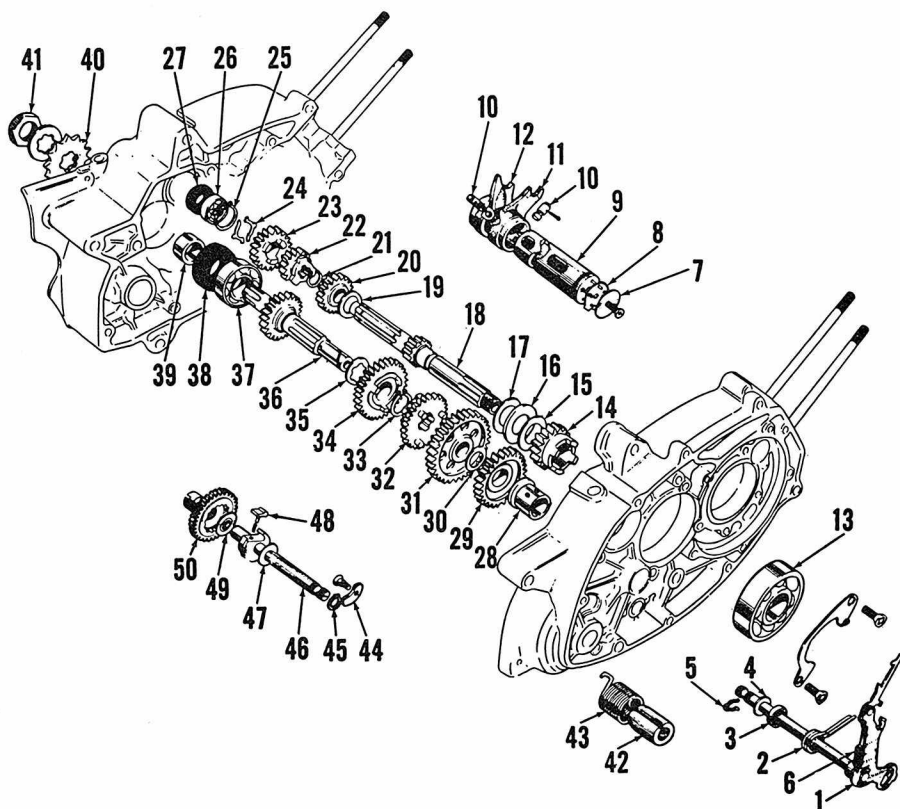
Exploded view of the transmission and kick starter assembly.
